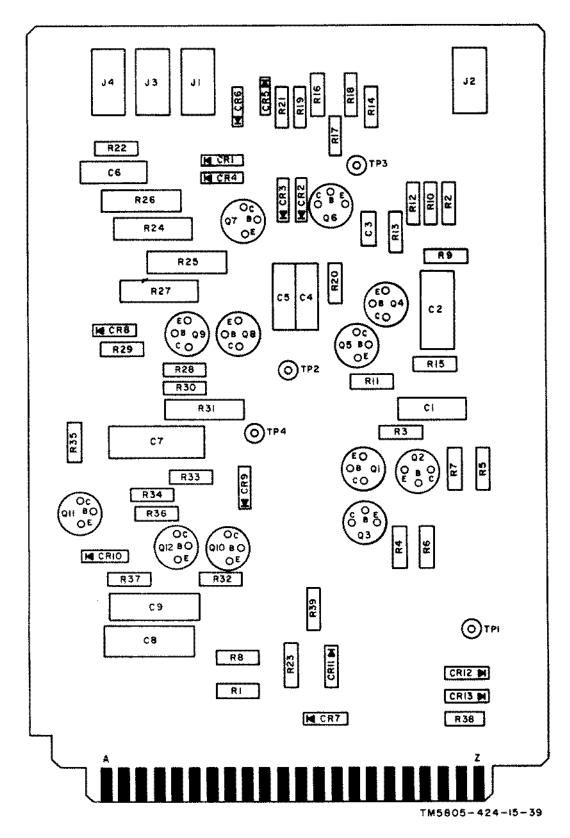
Printed-circuit card assembly A6 (PC 80034120), component location diagram.
